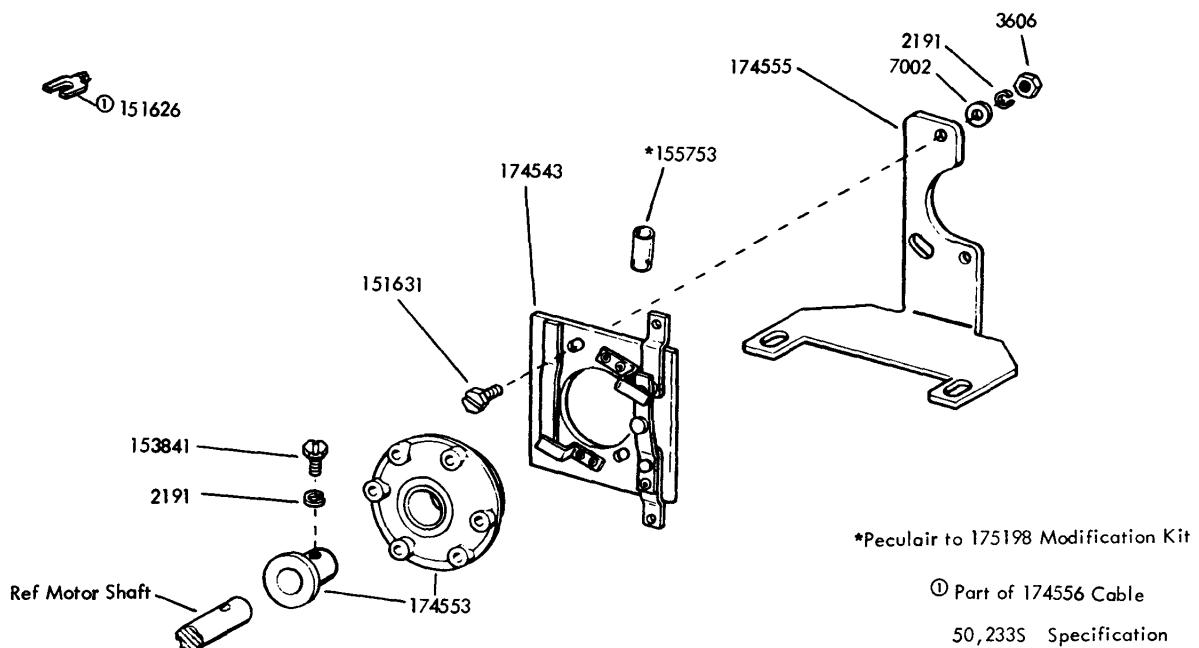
SERIES MOTOR MOUNTING PARTS WITH RF SUPPRESSION
